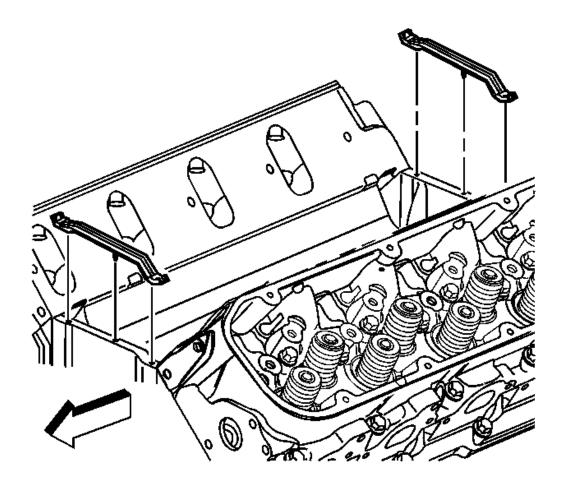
Applying Sealer To Engine Block/Cylinder Head Locations Courtesy of GENERAL MOTORS CORP.
